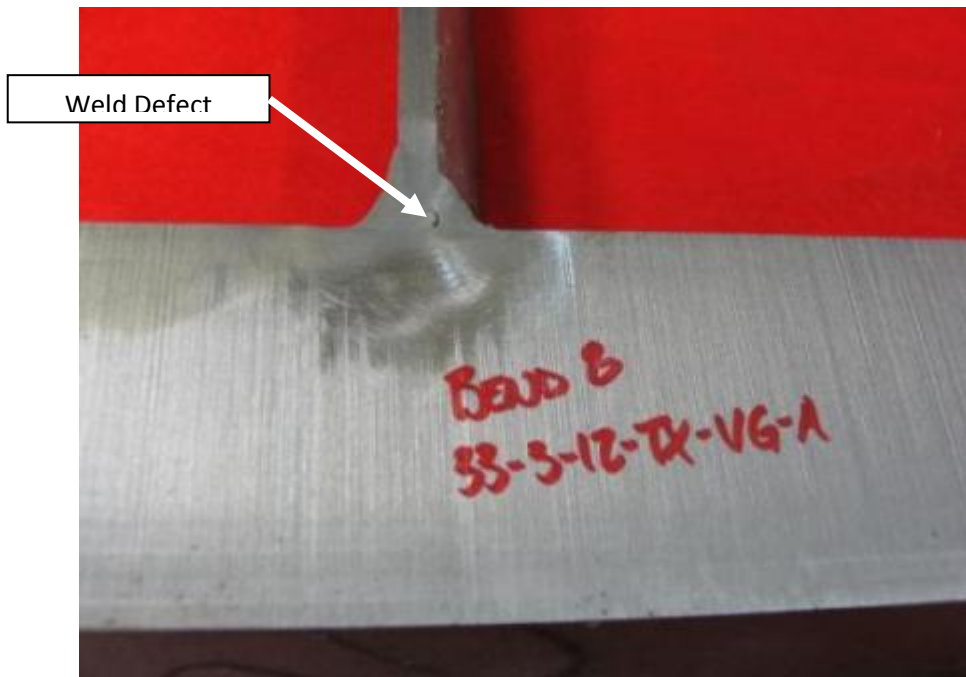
Cross Section of Bend 8 of Specimen 33-3-12-TX-VG-A Showing Apparent Weld Defect
